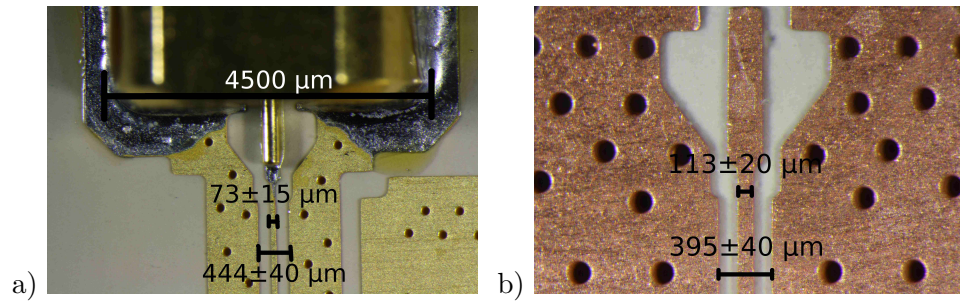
Pictures of a) a Type 1 PCB (with print connectors) and b) a Type 2 PCB (without print connectors) like it is used in this experiment. It can be seen, that the center conductor of the Type 2 PCB is wider than the center conductor of the PCB used in previous experiments. Type 1 PCB has a different colour, due to gold/silver layer on the top of the copper
